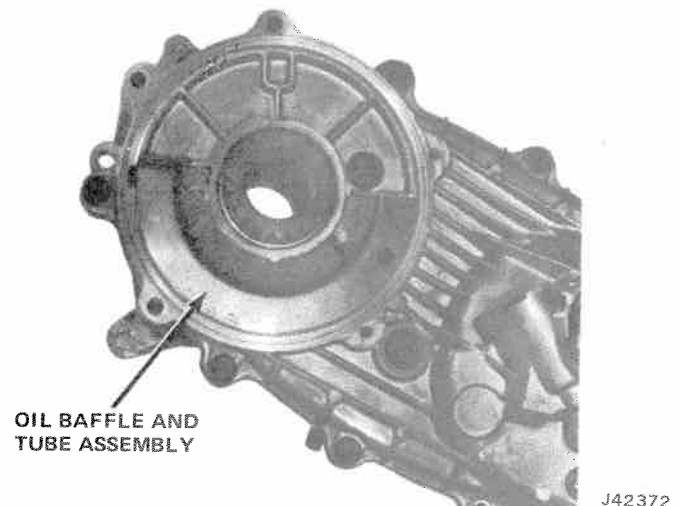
Reduction Oil Baffle and Tube Assembly Installed
